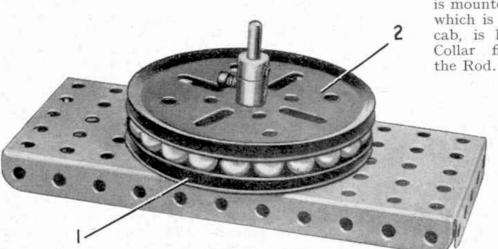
A small bearing of a type that can be used to support the swivelling cab of a crane, or other similar structure.
